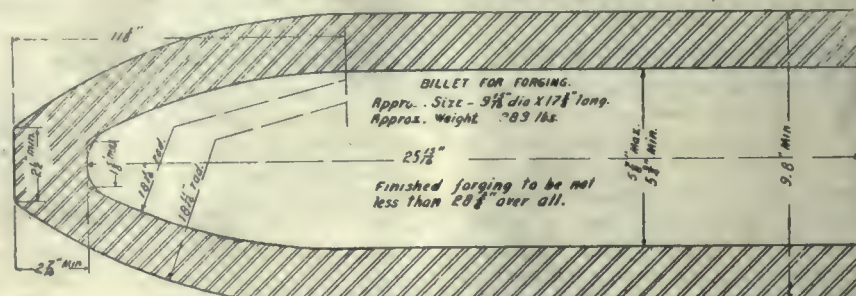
FORGING SIZES FOR 9.2 IN. HOWITZER SHELL.
